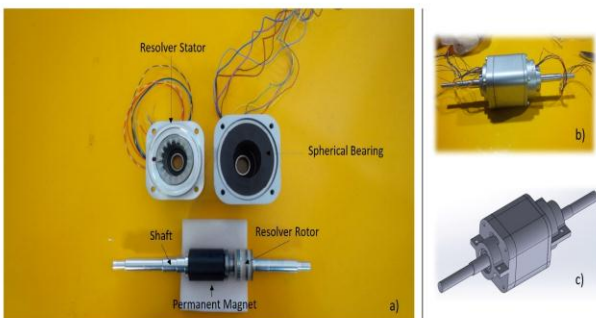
KBM-14h01-B motor: a) before installation; b) after installation; c) 3D CAD drawing.
